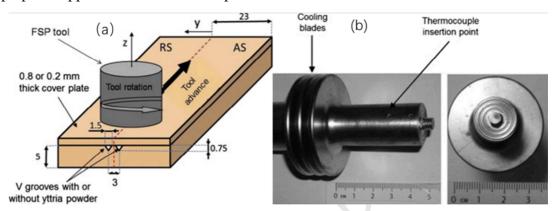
(a) Schematic diagrams of the machined plates (RS=retreating side, AS=advancing side), (b) Features of the tool shoulder and probe and position of the thermocouple [43].
